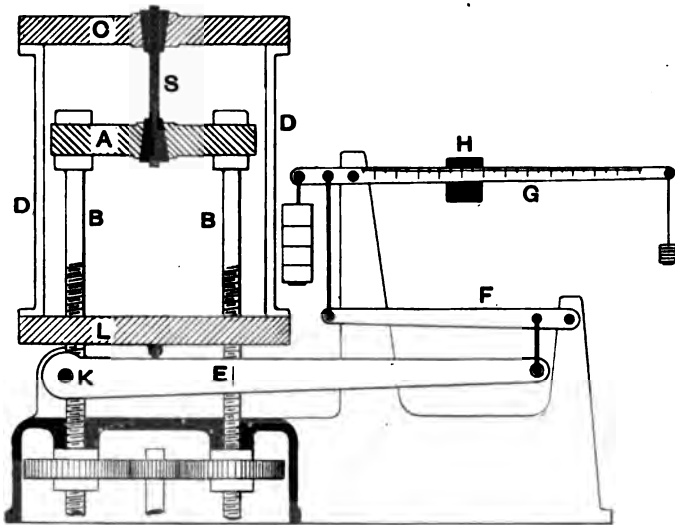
Diagrammatic View of Olsen Testing Machine.
